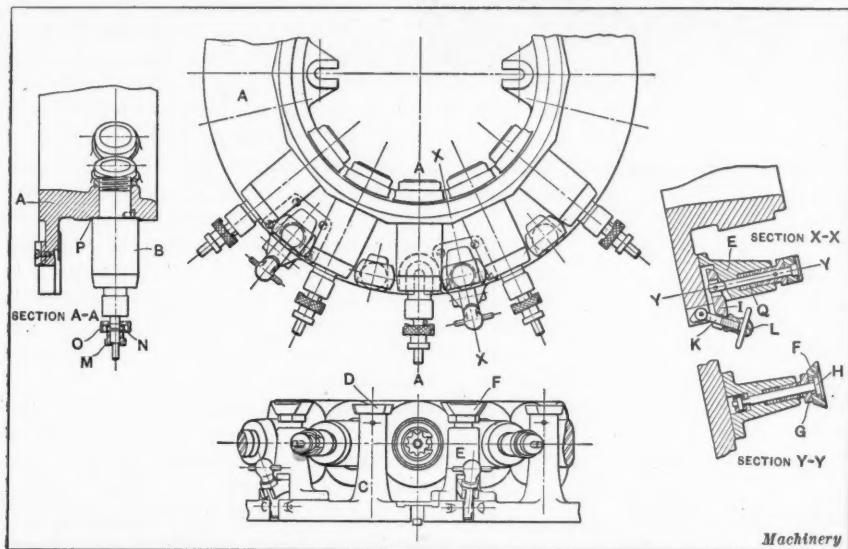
Design of Rotary Milling Fixture shown in Fig. 3
